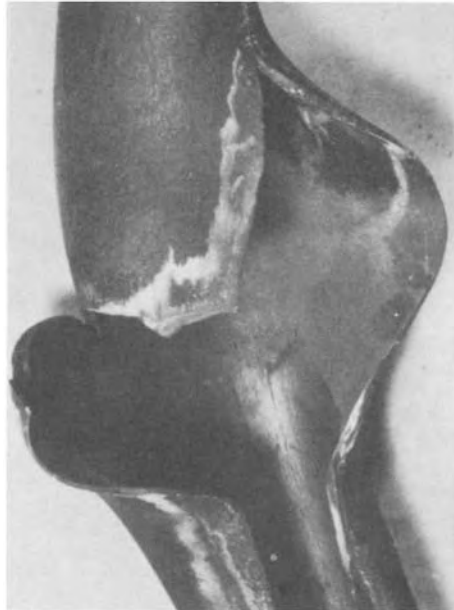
Thin-lip rupture in a boiler tube caused by rapid overheating. This rupture exhibits a “cobra” appearance as a result of lateral bending under the reaction force imposed by escaping steam. The tube was a 2½ in. outside diameter, 0.250 in. wall boiler tube made of 1.25Cr-0.5Mo steel (ASME SA-213). Source: Ref 1
